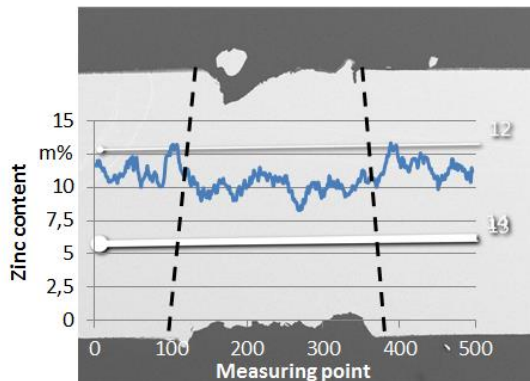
Zinc content in weld zone of CuZn10 welded with 2 kW and 33 mm/s
